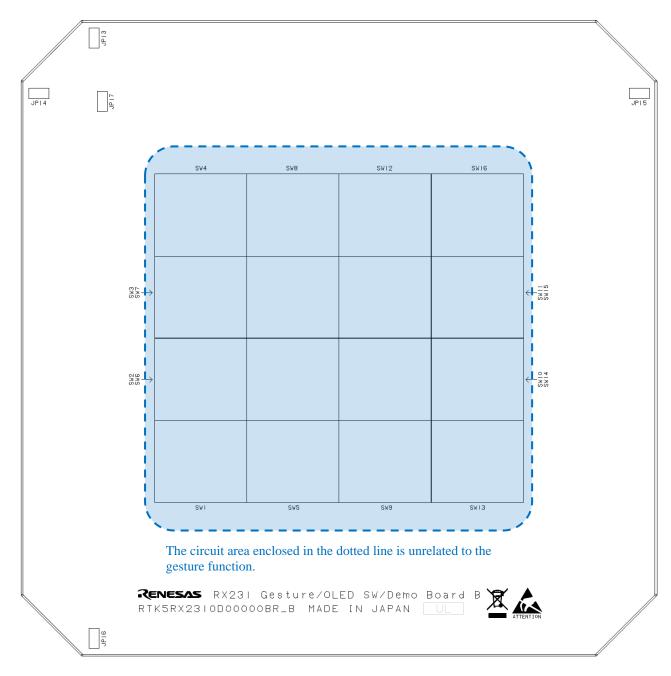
Component Side Silkscreen (top view, SW1 to SW16 not used)
